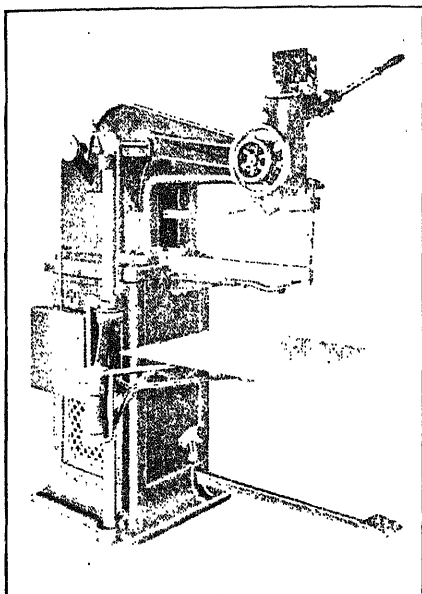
Winfield Heavy-Duty Machine with Adjustable Table.
